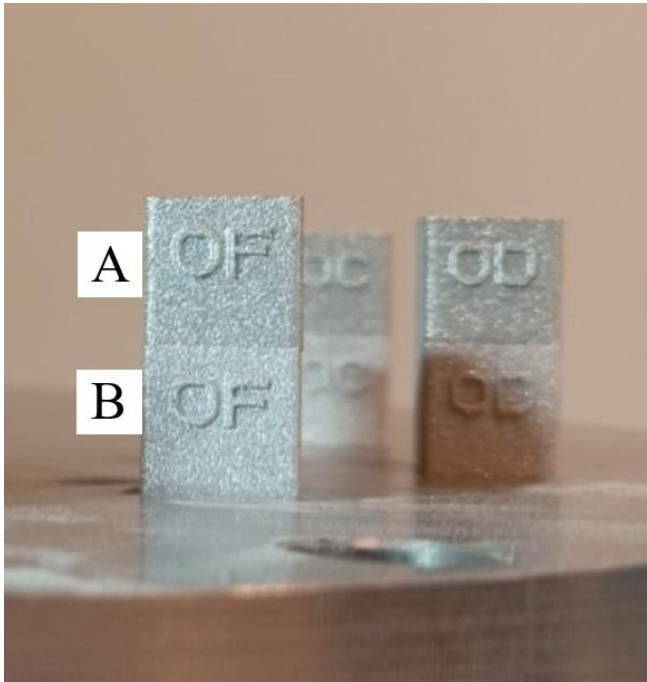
Workpieces built onto the building platform that have not yet been removed. The marking “OF”, “OD” and “OC” identified the workpieces, the markings are 0.3 mm protrusions from the side.
